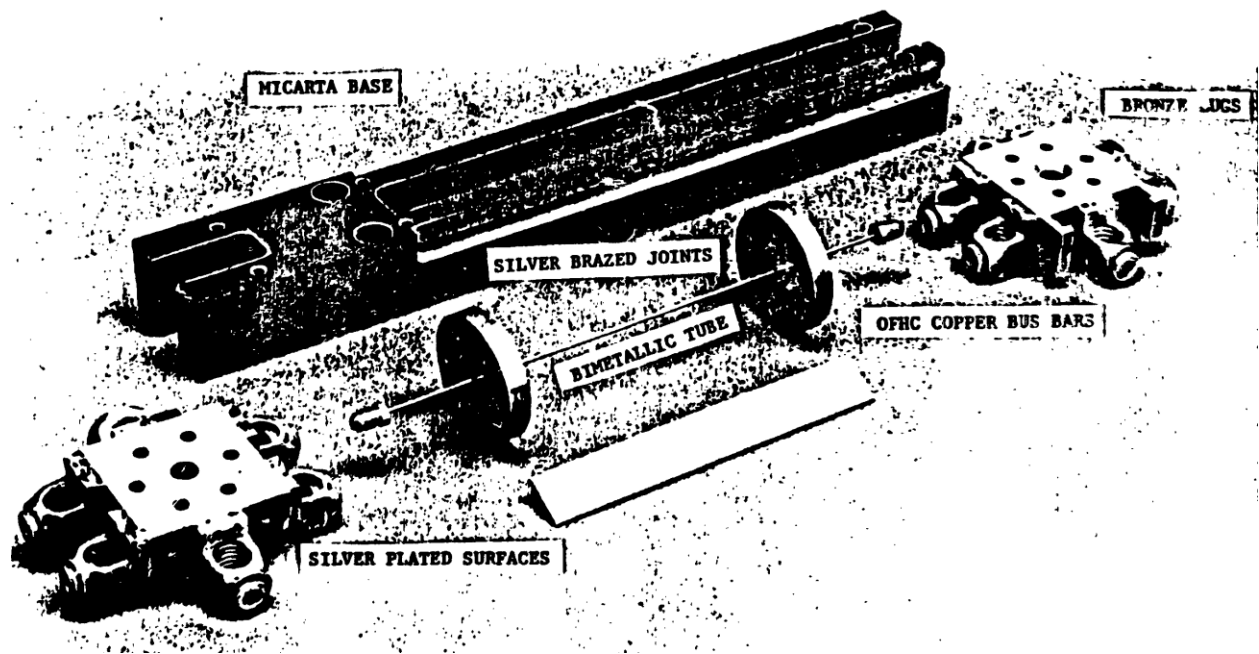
MSFC-Rocketdyne Test Section Assembly [7]
